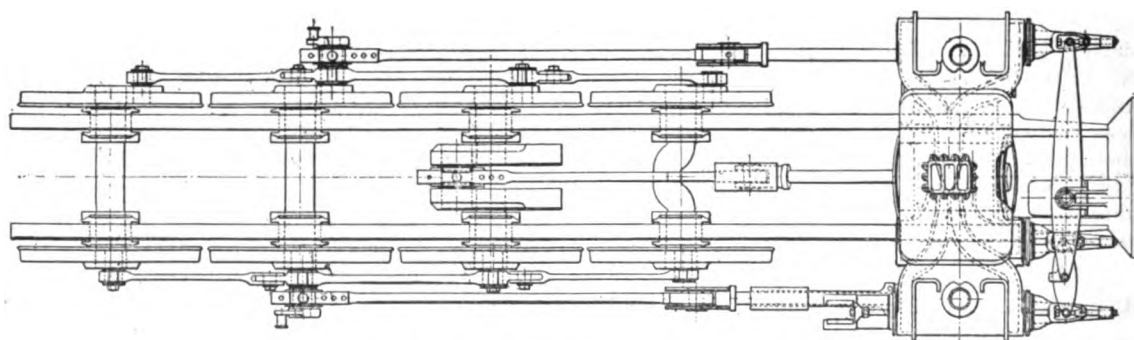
Plan view of the valve mechanism of a three-cylinder locomotive
